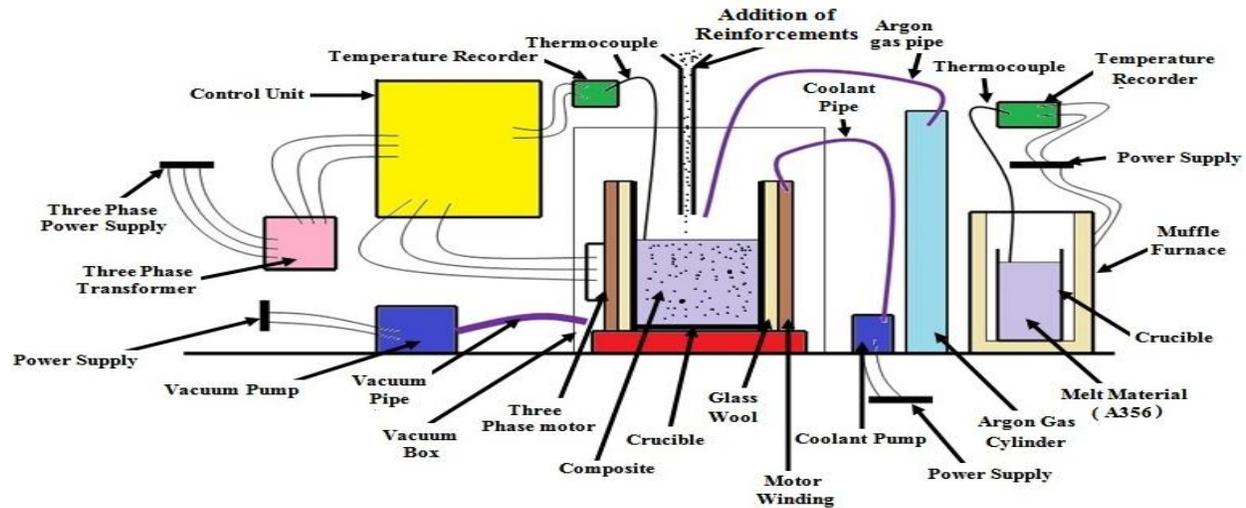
Schematic View of Electromagnetic Stir Casting Set-Up
